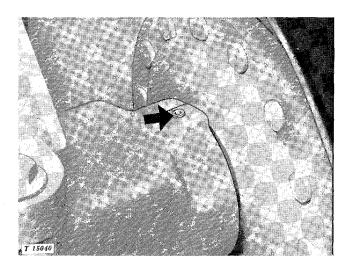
Axle Bearing Plug (Front Shown) (4 Points)
